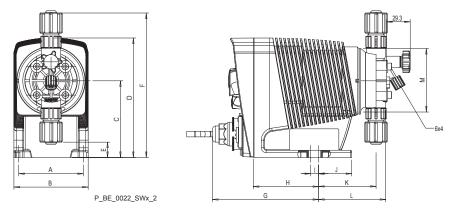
Dimension drawing Beta b BT4b/BT5b, material version PV - dimensions in mm
